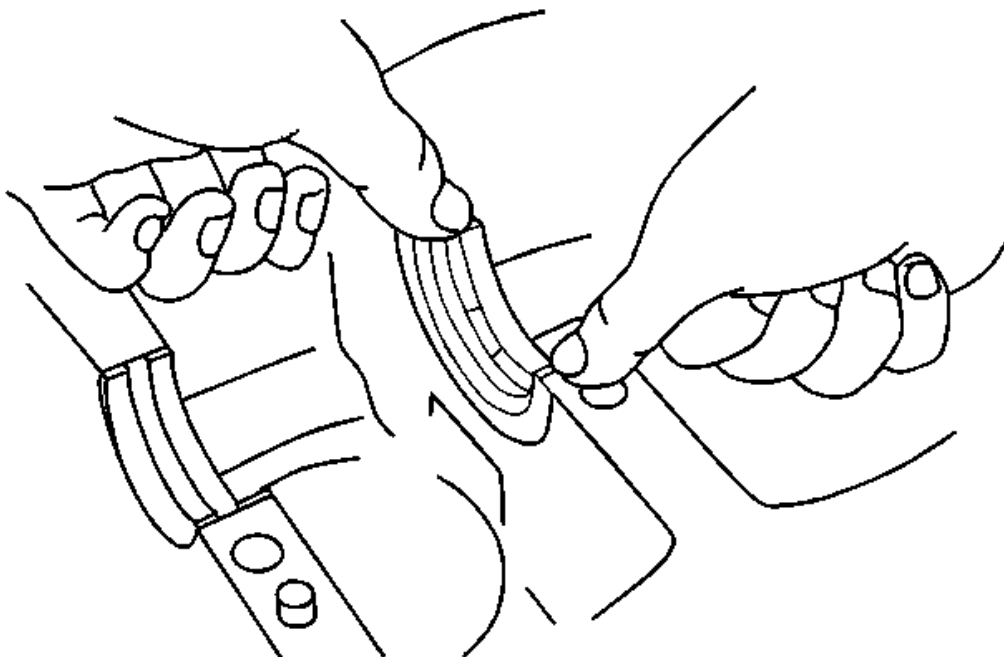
Installing Upper Main Bearings Into Cylinder Block
